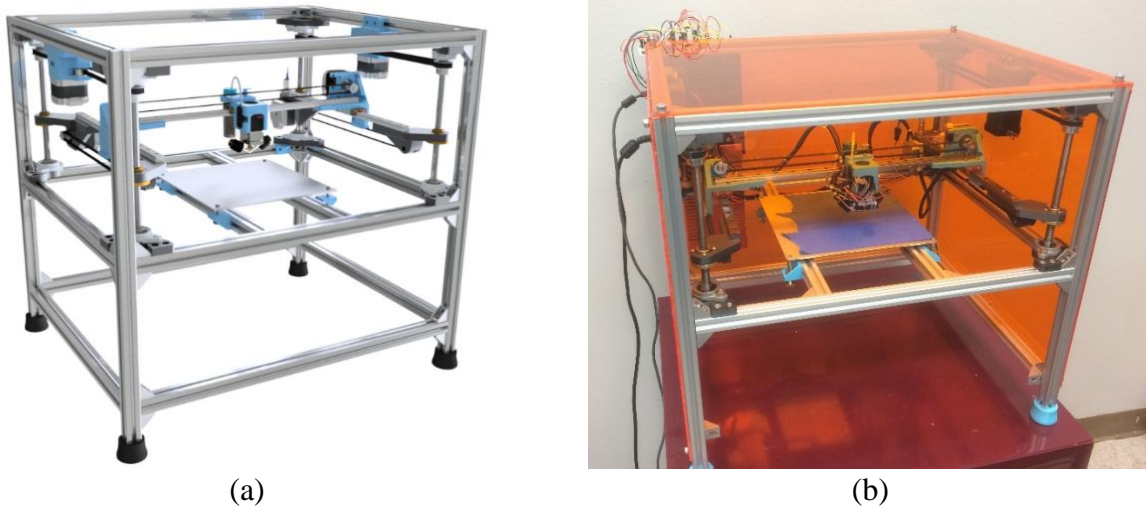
Overall design of prototype machine: (a) CAD drawing and (b) fabricated machine
